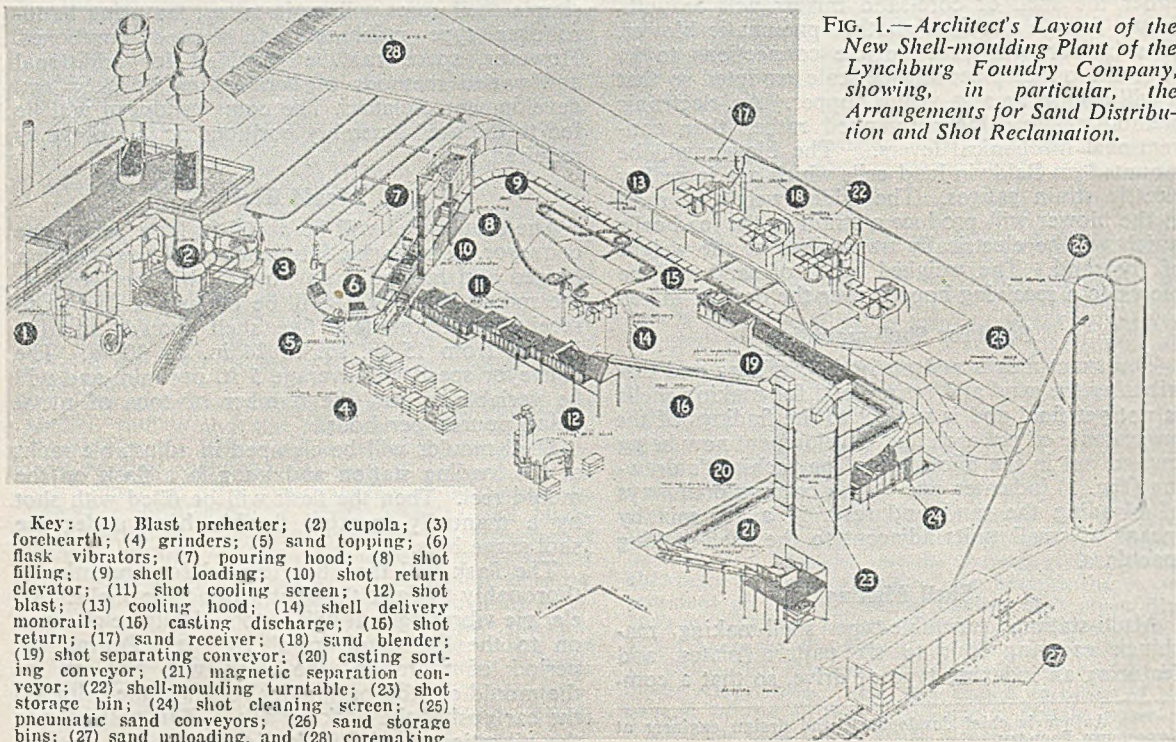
Architect's Layout of the New Shell-moulding Plant of the Lynchburg Foundry Company, showing, in particular, the Arrangements for Sand Distribution and Shot Reclamation.
